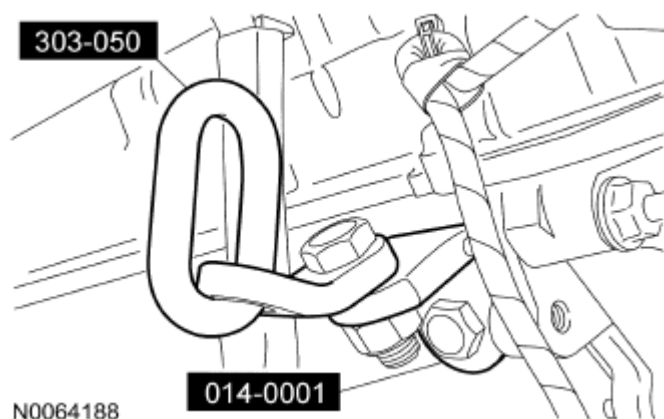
Lifting Bracket To Front Of RH Cylinder Head
